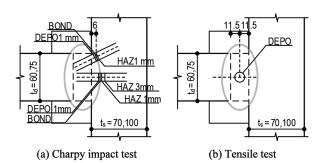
Specimens and their locations of Charpy impact test and tensile test for ESW connection
